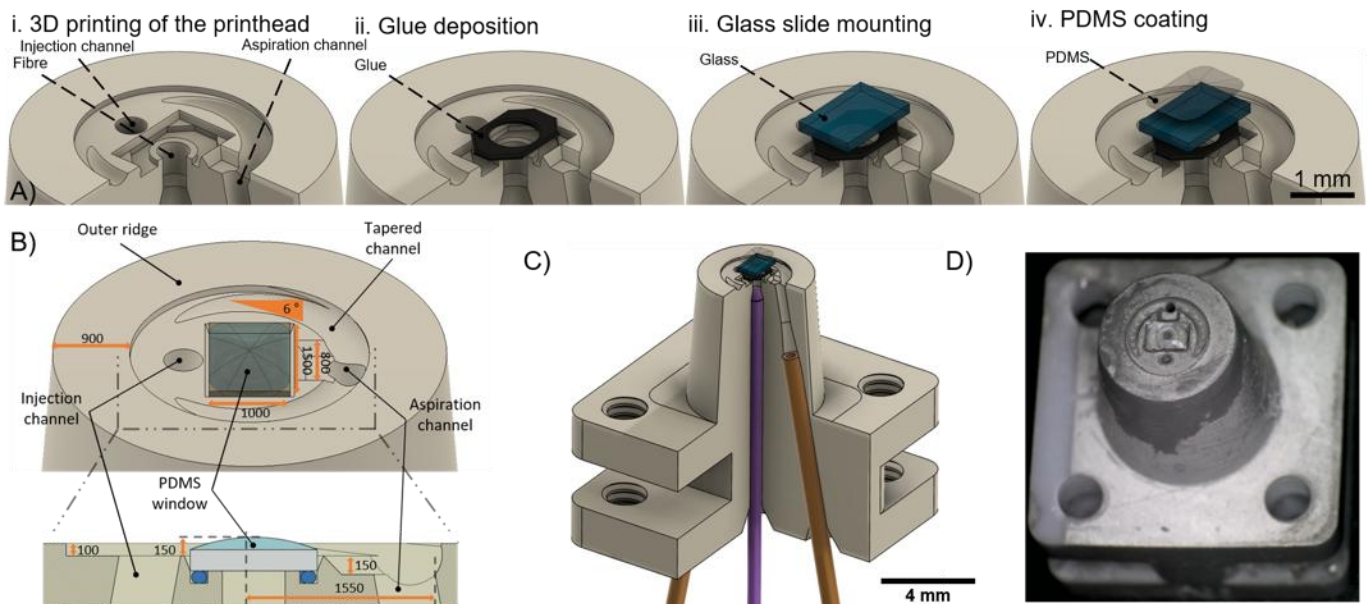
Printhead fabrication protocol. (A) Design of the printhead obtained by SLA 3D printing (i). A glass slide is bound to the printhead (ii–iii) and protected with a PDMS coating (iv). (B) Top view and cross cut image of the printhead structures and dimensions (values are given in μm). (C) Overall view of the printhead showing the structure of the injection and aspiration channels (orange) and the insertion of an optical fibre (purple). (D) Optical micrograph of an assembled printing head.
